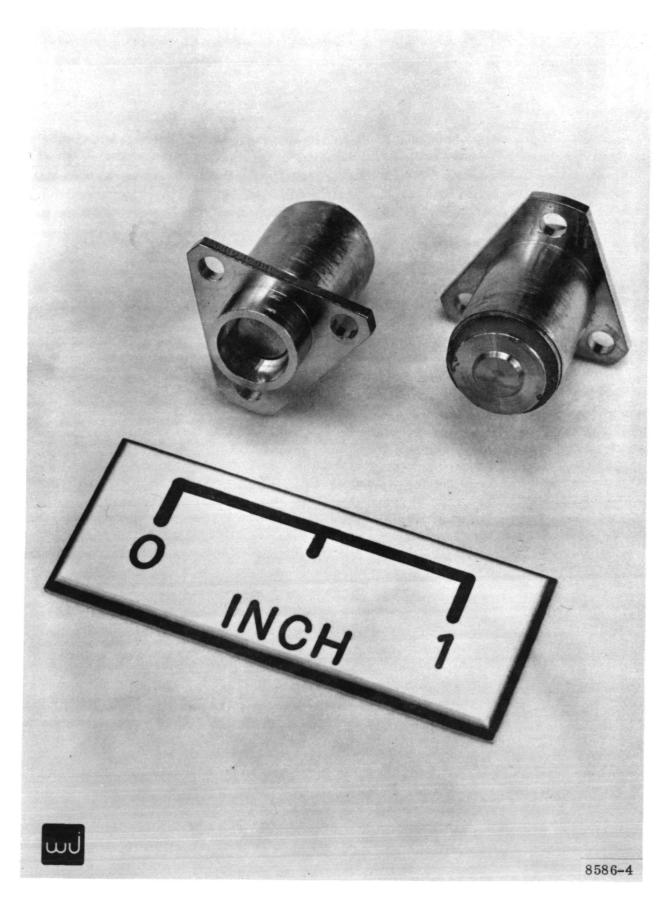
Front and rear view of cathode assemblies. Heater terminal is the disc at rear of right assembly.
